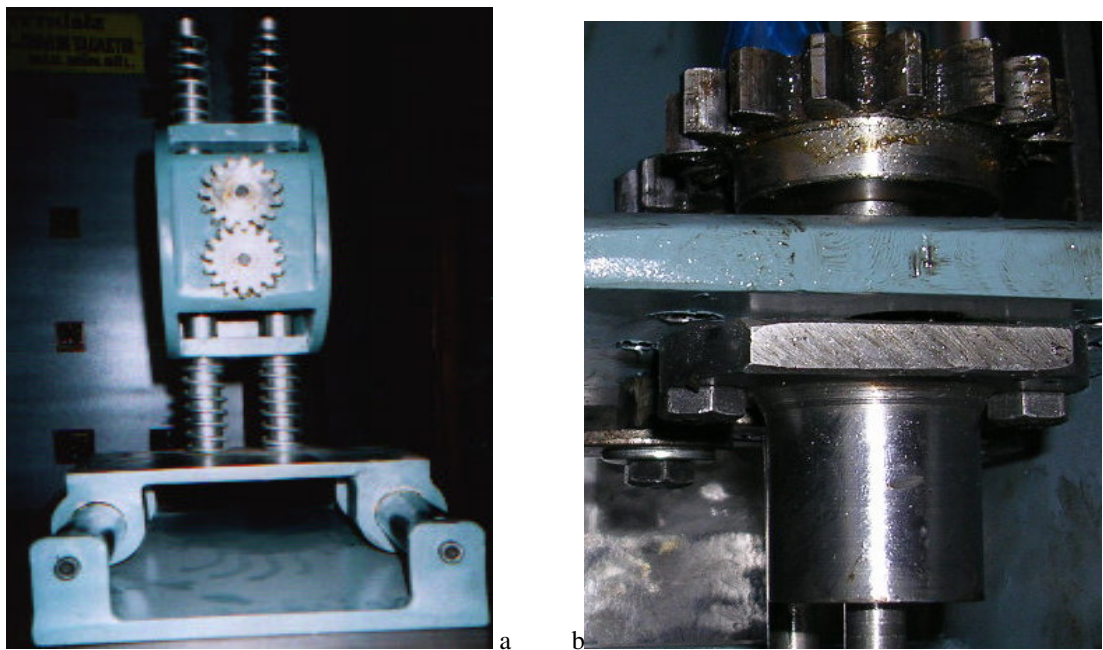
Spur gear pair a) mesh position b) with bearing house
